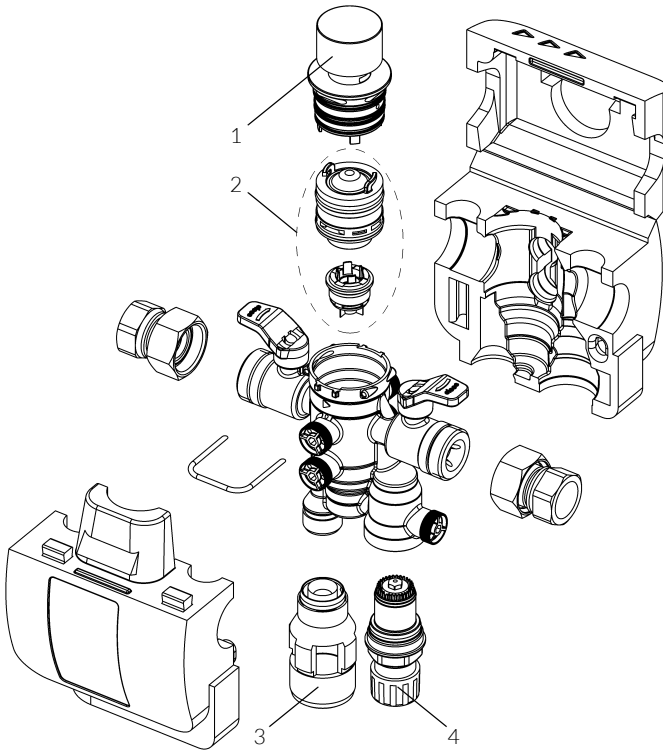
Spare parts CLEAR FILL heating circuit refill unit
